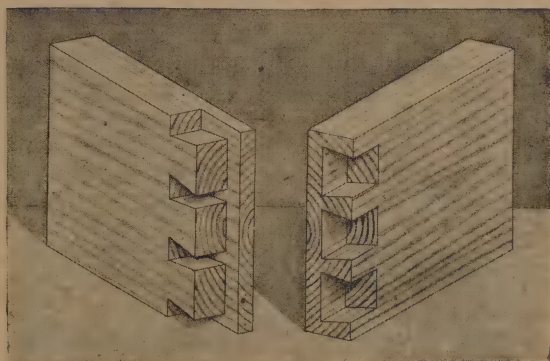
Secret Dovetail: Pins on Square End (Inner View)
